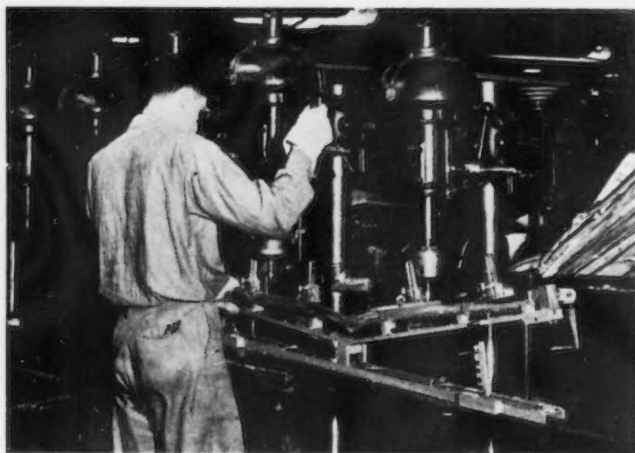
Drilling and tapping V-shaped grille parts. In castings where the axes of the holes are not parallel, a rocking fixture is used, which is slid along the press and the parts tilted to obtain the proper drilling angle.
